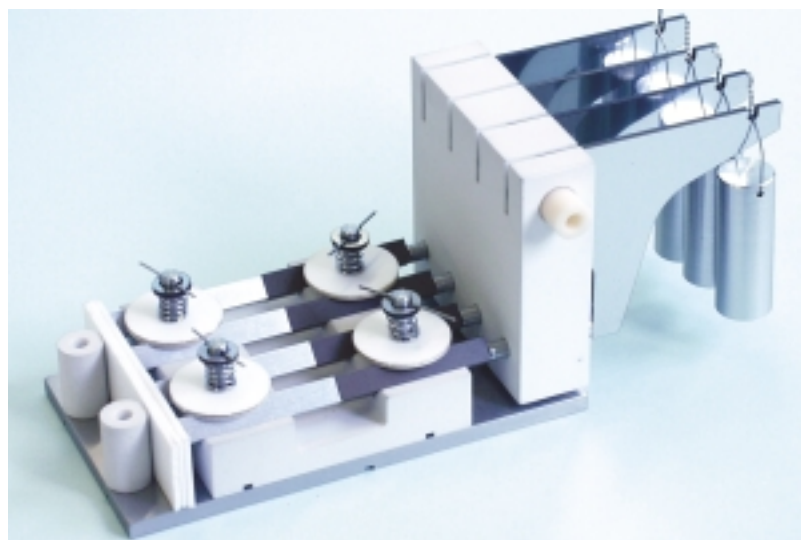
Experimental set-up for vacuum brazing of metal-ceramic specimens. Dimension of joining partners: 4 x 3 x 25 mm.
